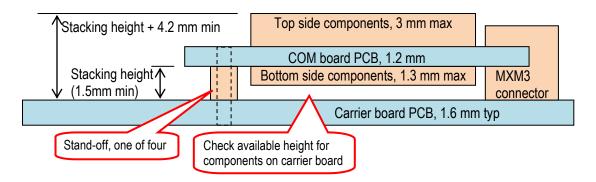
EACOM Board Mounting in MXM3 Connector, Stacking Height
